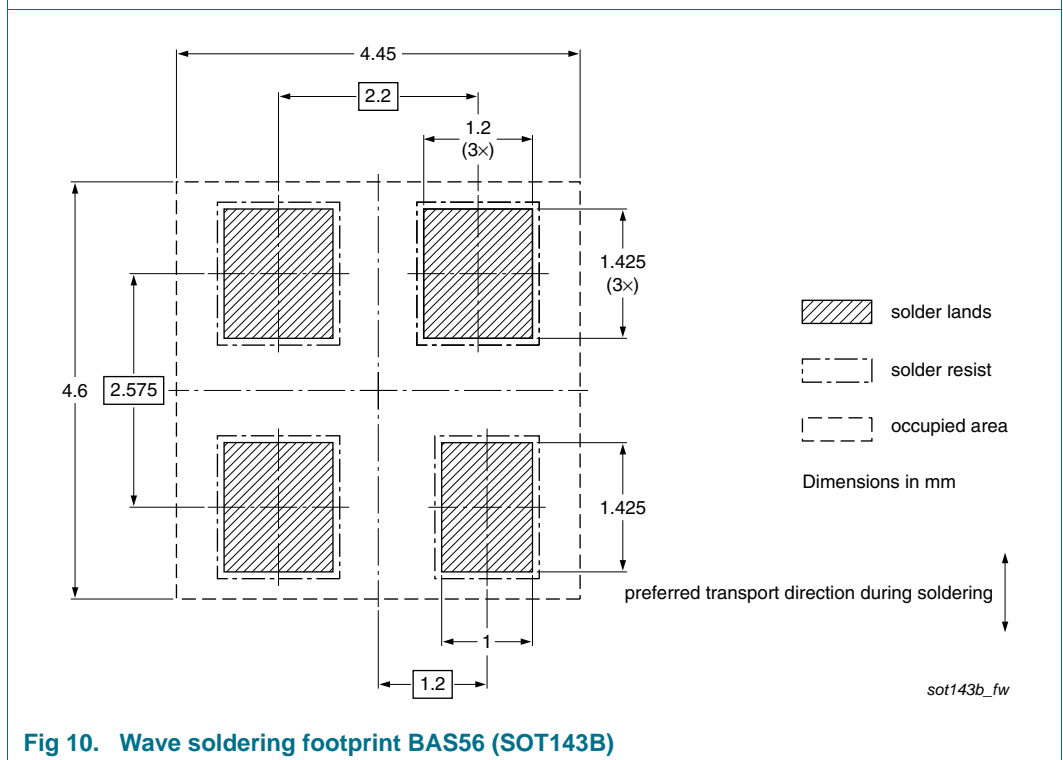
Wave soldering footprint BAS56 (SOT143B)
